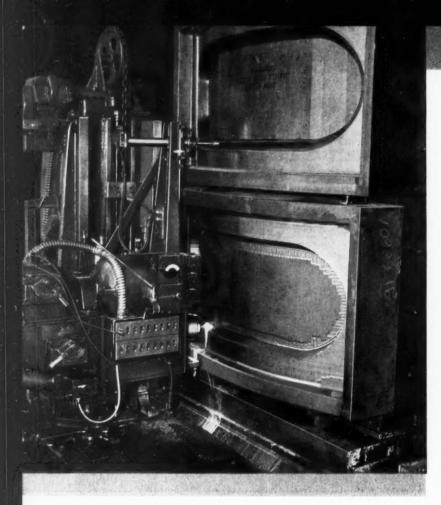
Machining a Large Die Required for the Forming of Airplane Doors on a Kellermatic Tool-room Machine
